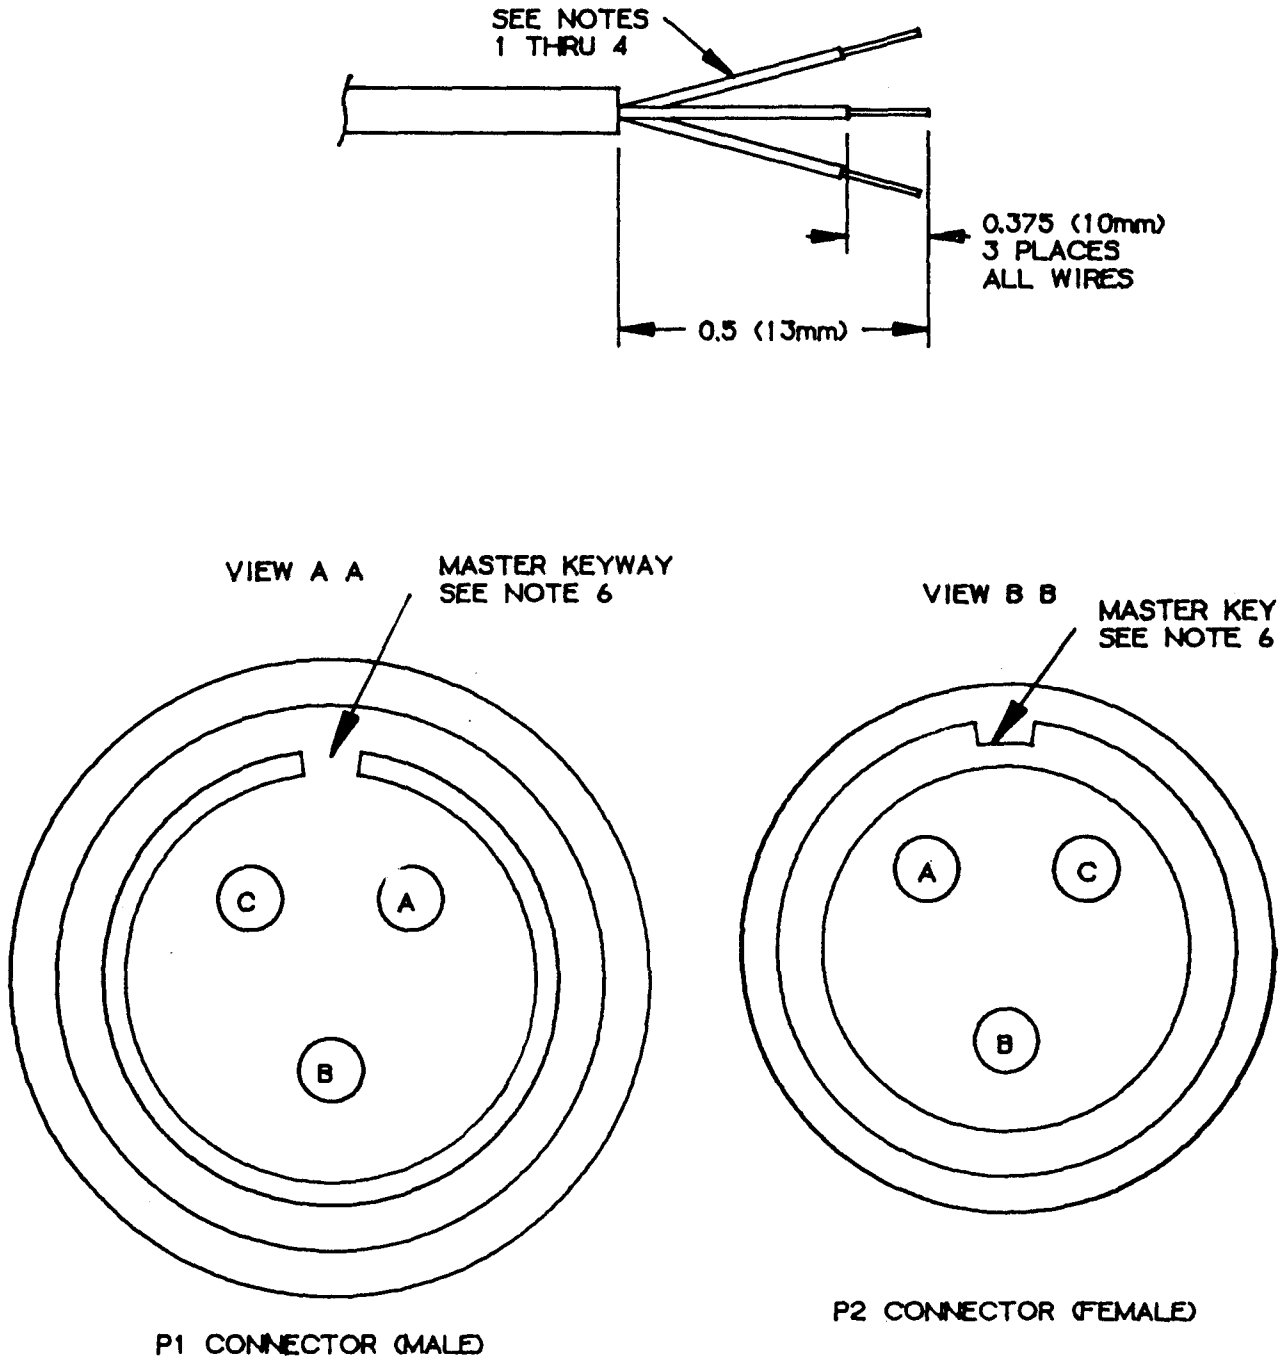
20-amp, 15-ft (4.57m) extension cable. (sheet 2 of 3)
